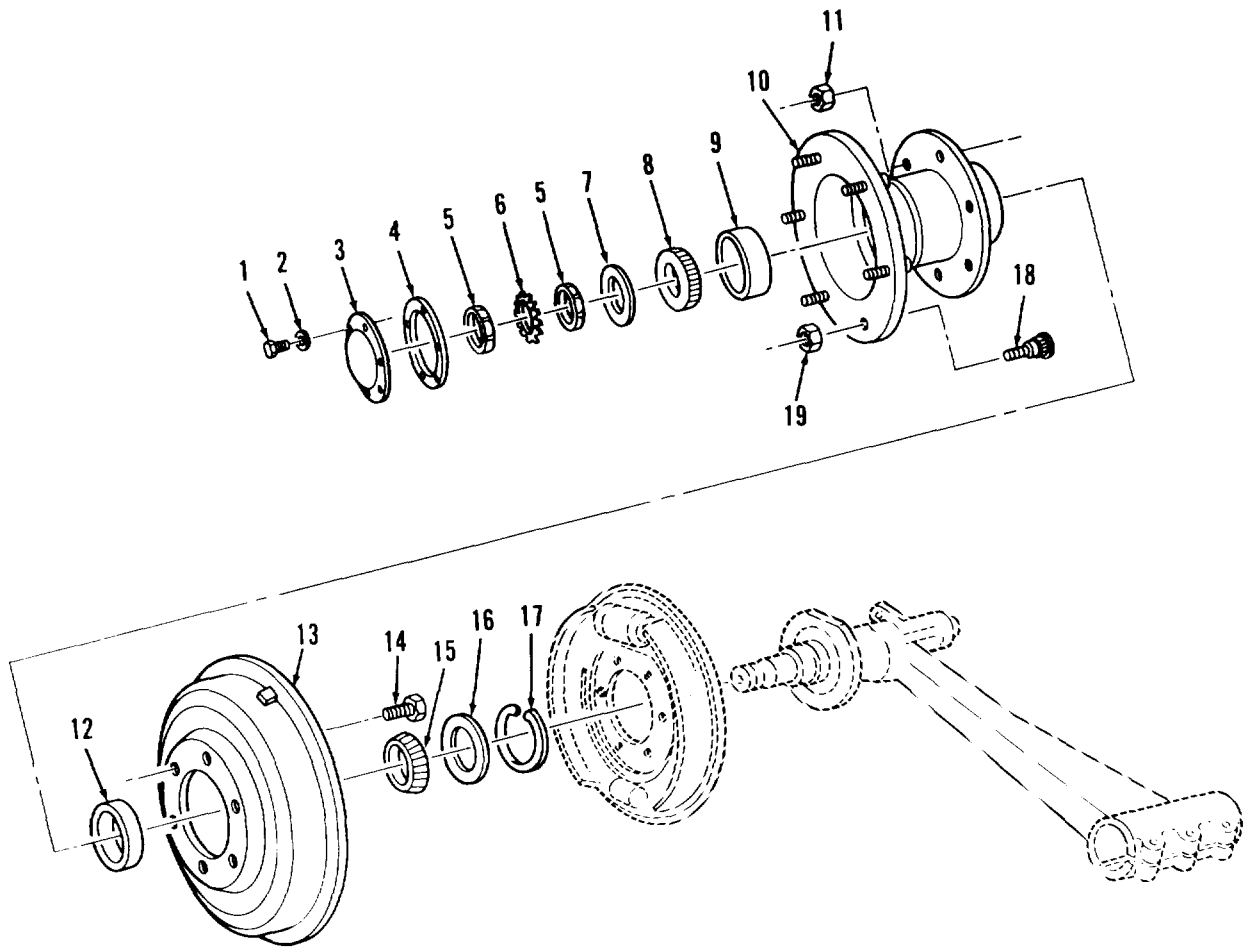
HUB AND BRAKEDRUM ASSEMBLY (M514)
